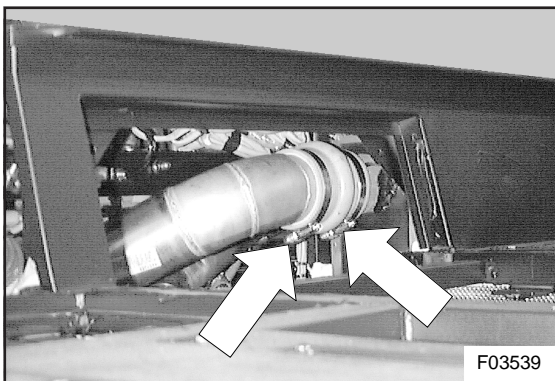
DD intercooler outlet bellows (view from passenger compartment)
